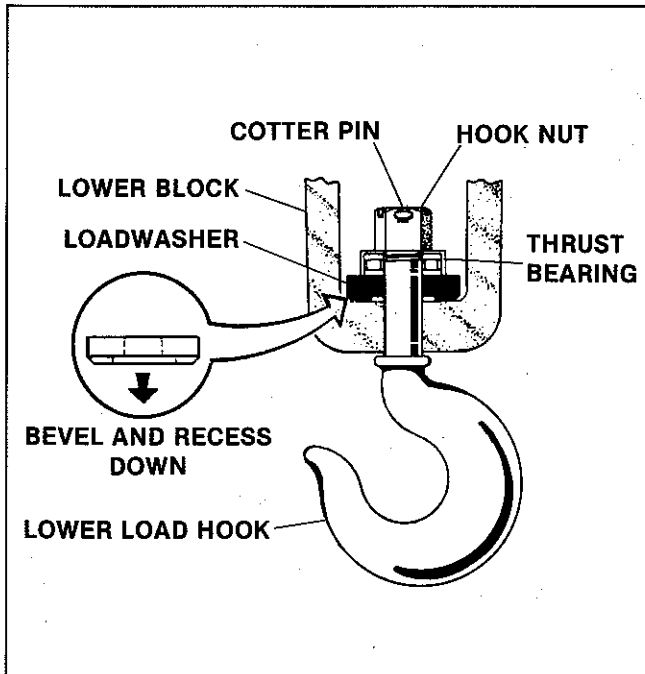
Installation of Load Washer (3 Through 6-Ton)
